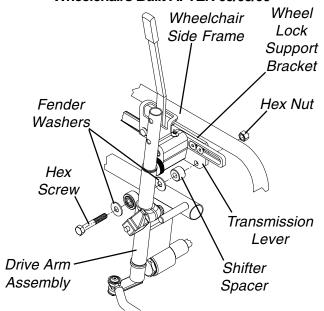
INSTALLING/REMOVING DRIVE ARM ASSEMBLY TO/FROM TRANSMISSION
